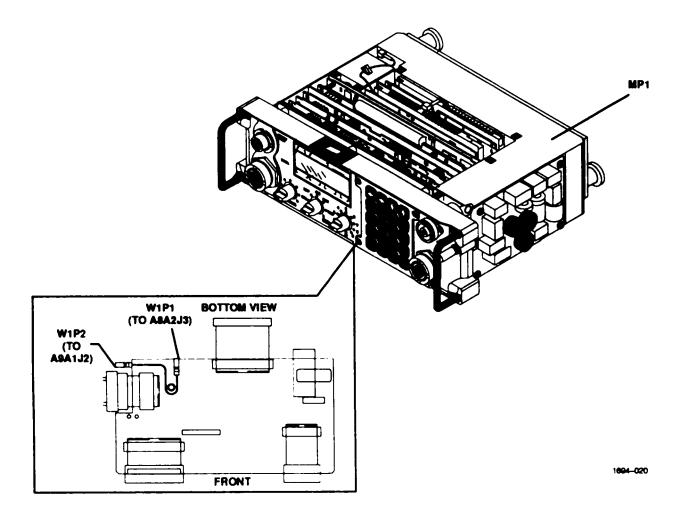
W1 Coaxial Cable Assembly Removal and Replacement
